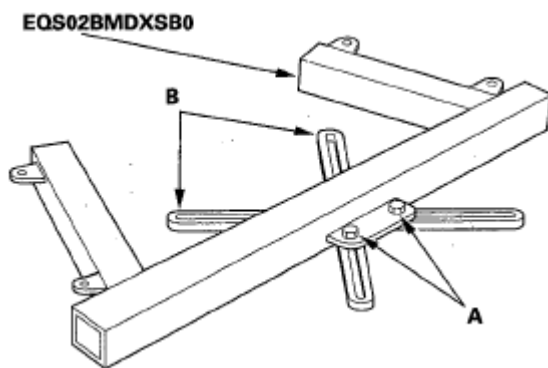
Identifying Adjustable Arms Of Front Subframe Adapter To Center Plate
